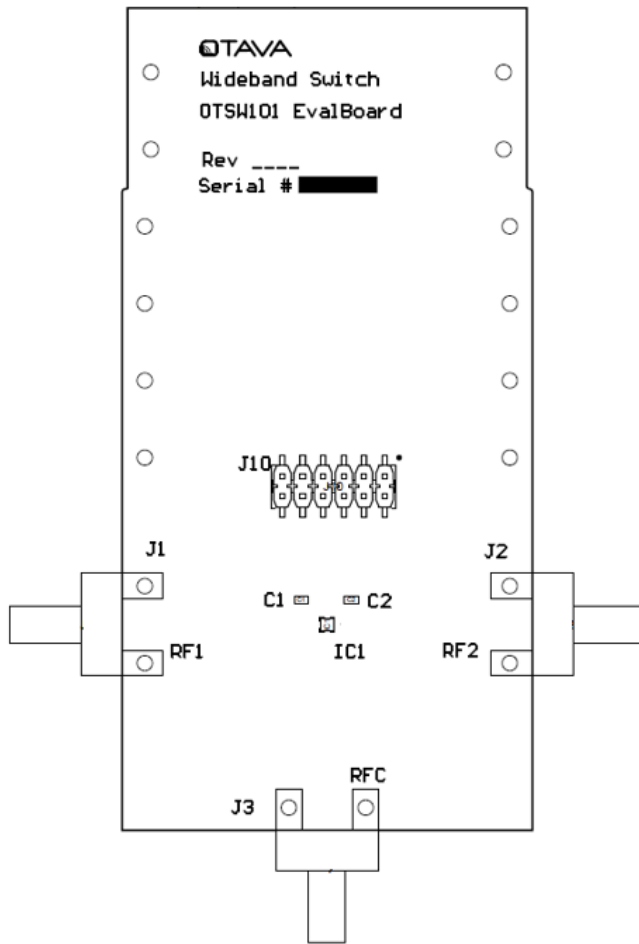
OTSW101-EVAL Assembly Drawing (Top)
